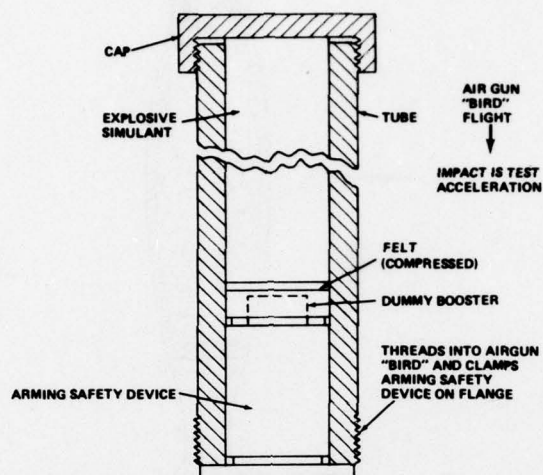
Fixture for air gun test with explosive simulant bearing on arming safety device.
